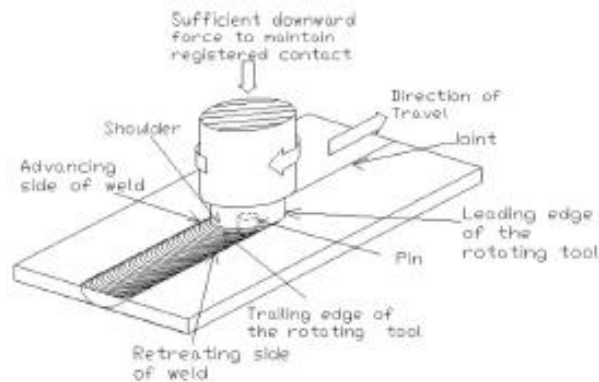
Friction Stir Welding Basic Diagram [Cook et al., 2004]
